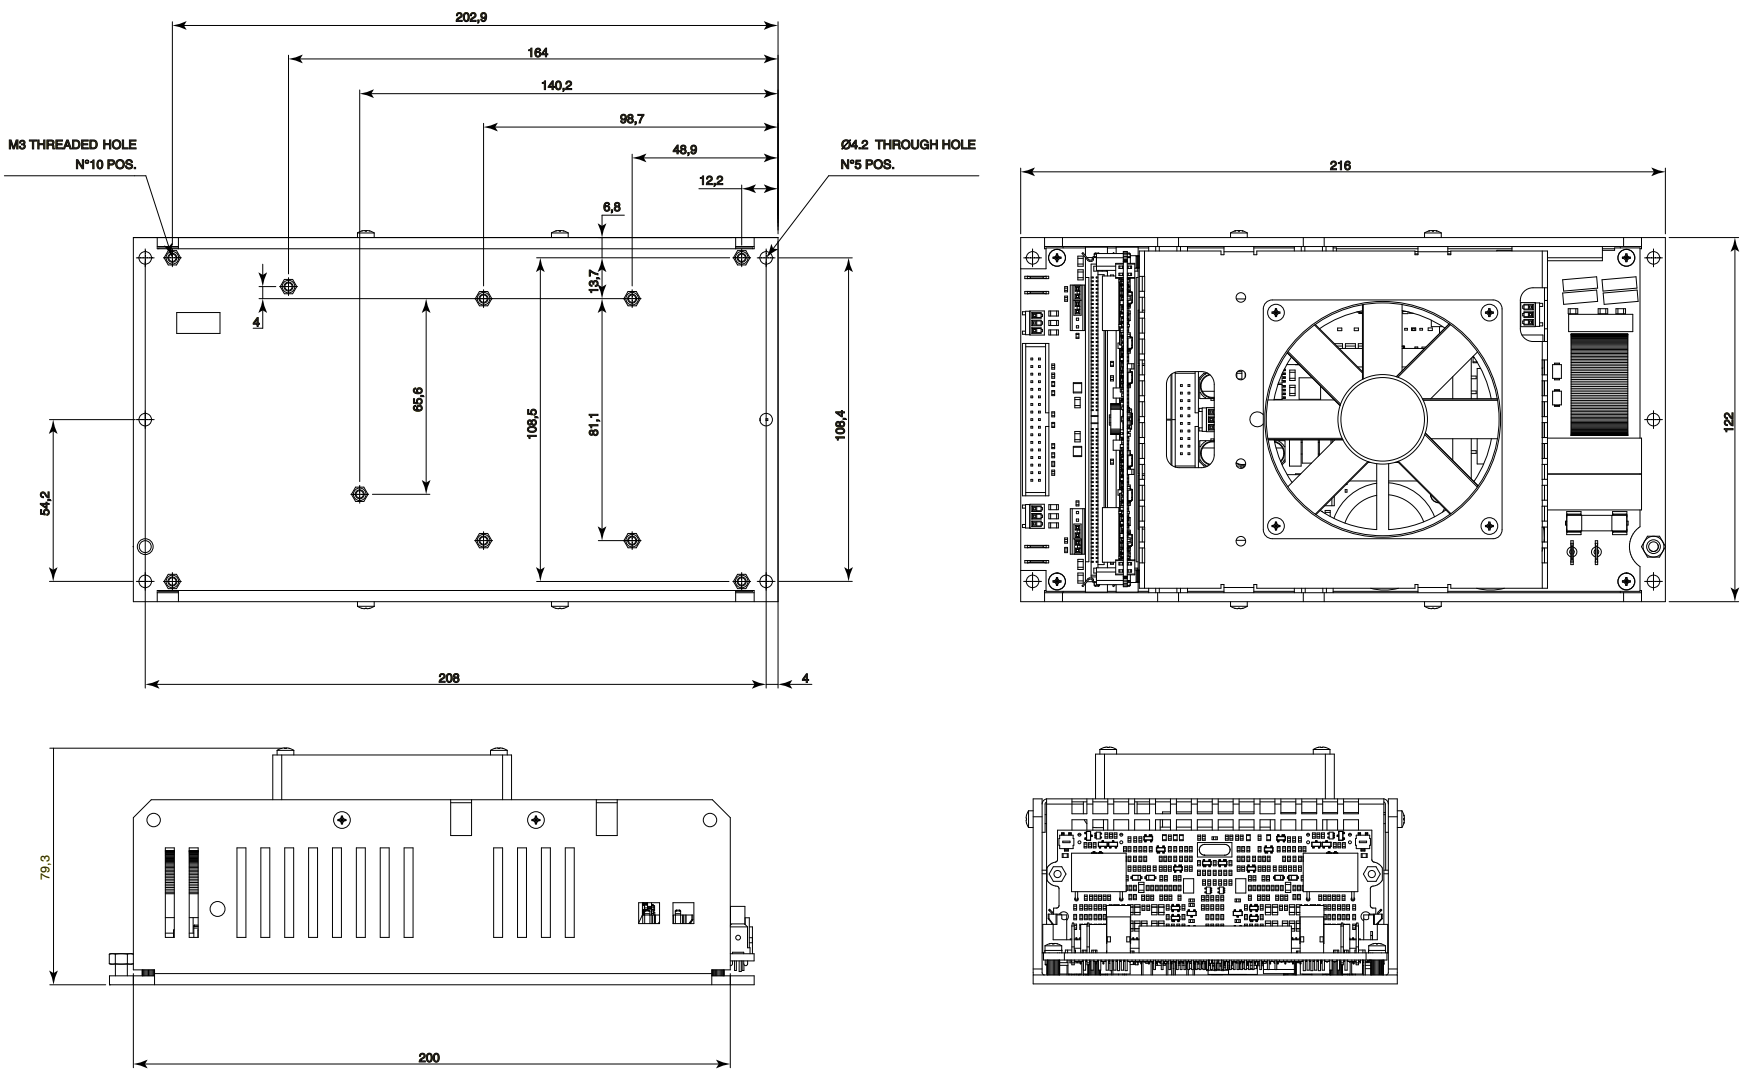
DigiMod 3004PFC2 mechanical drawings.
